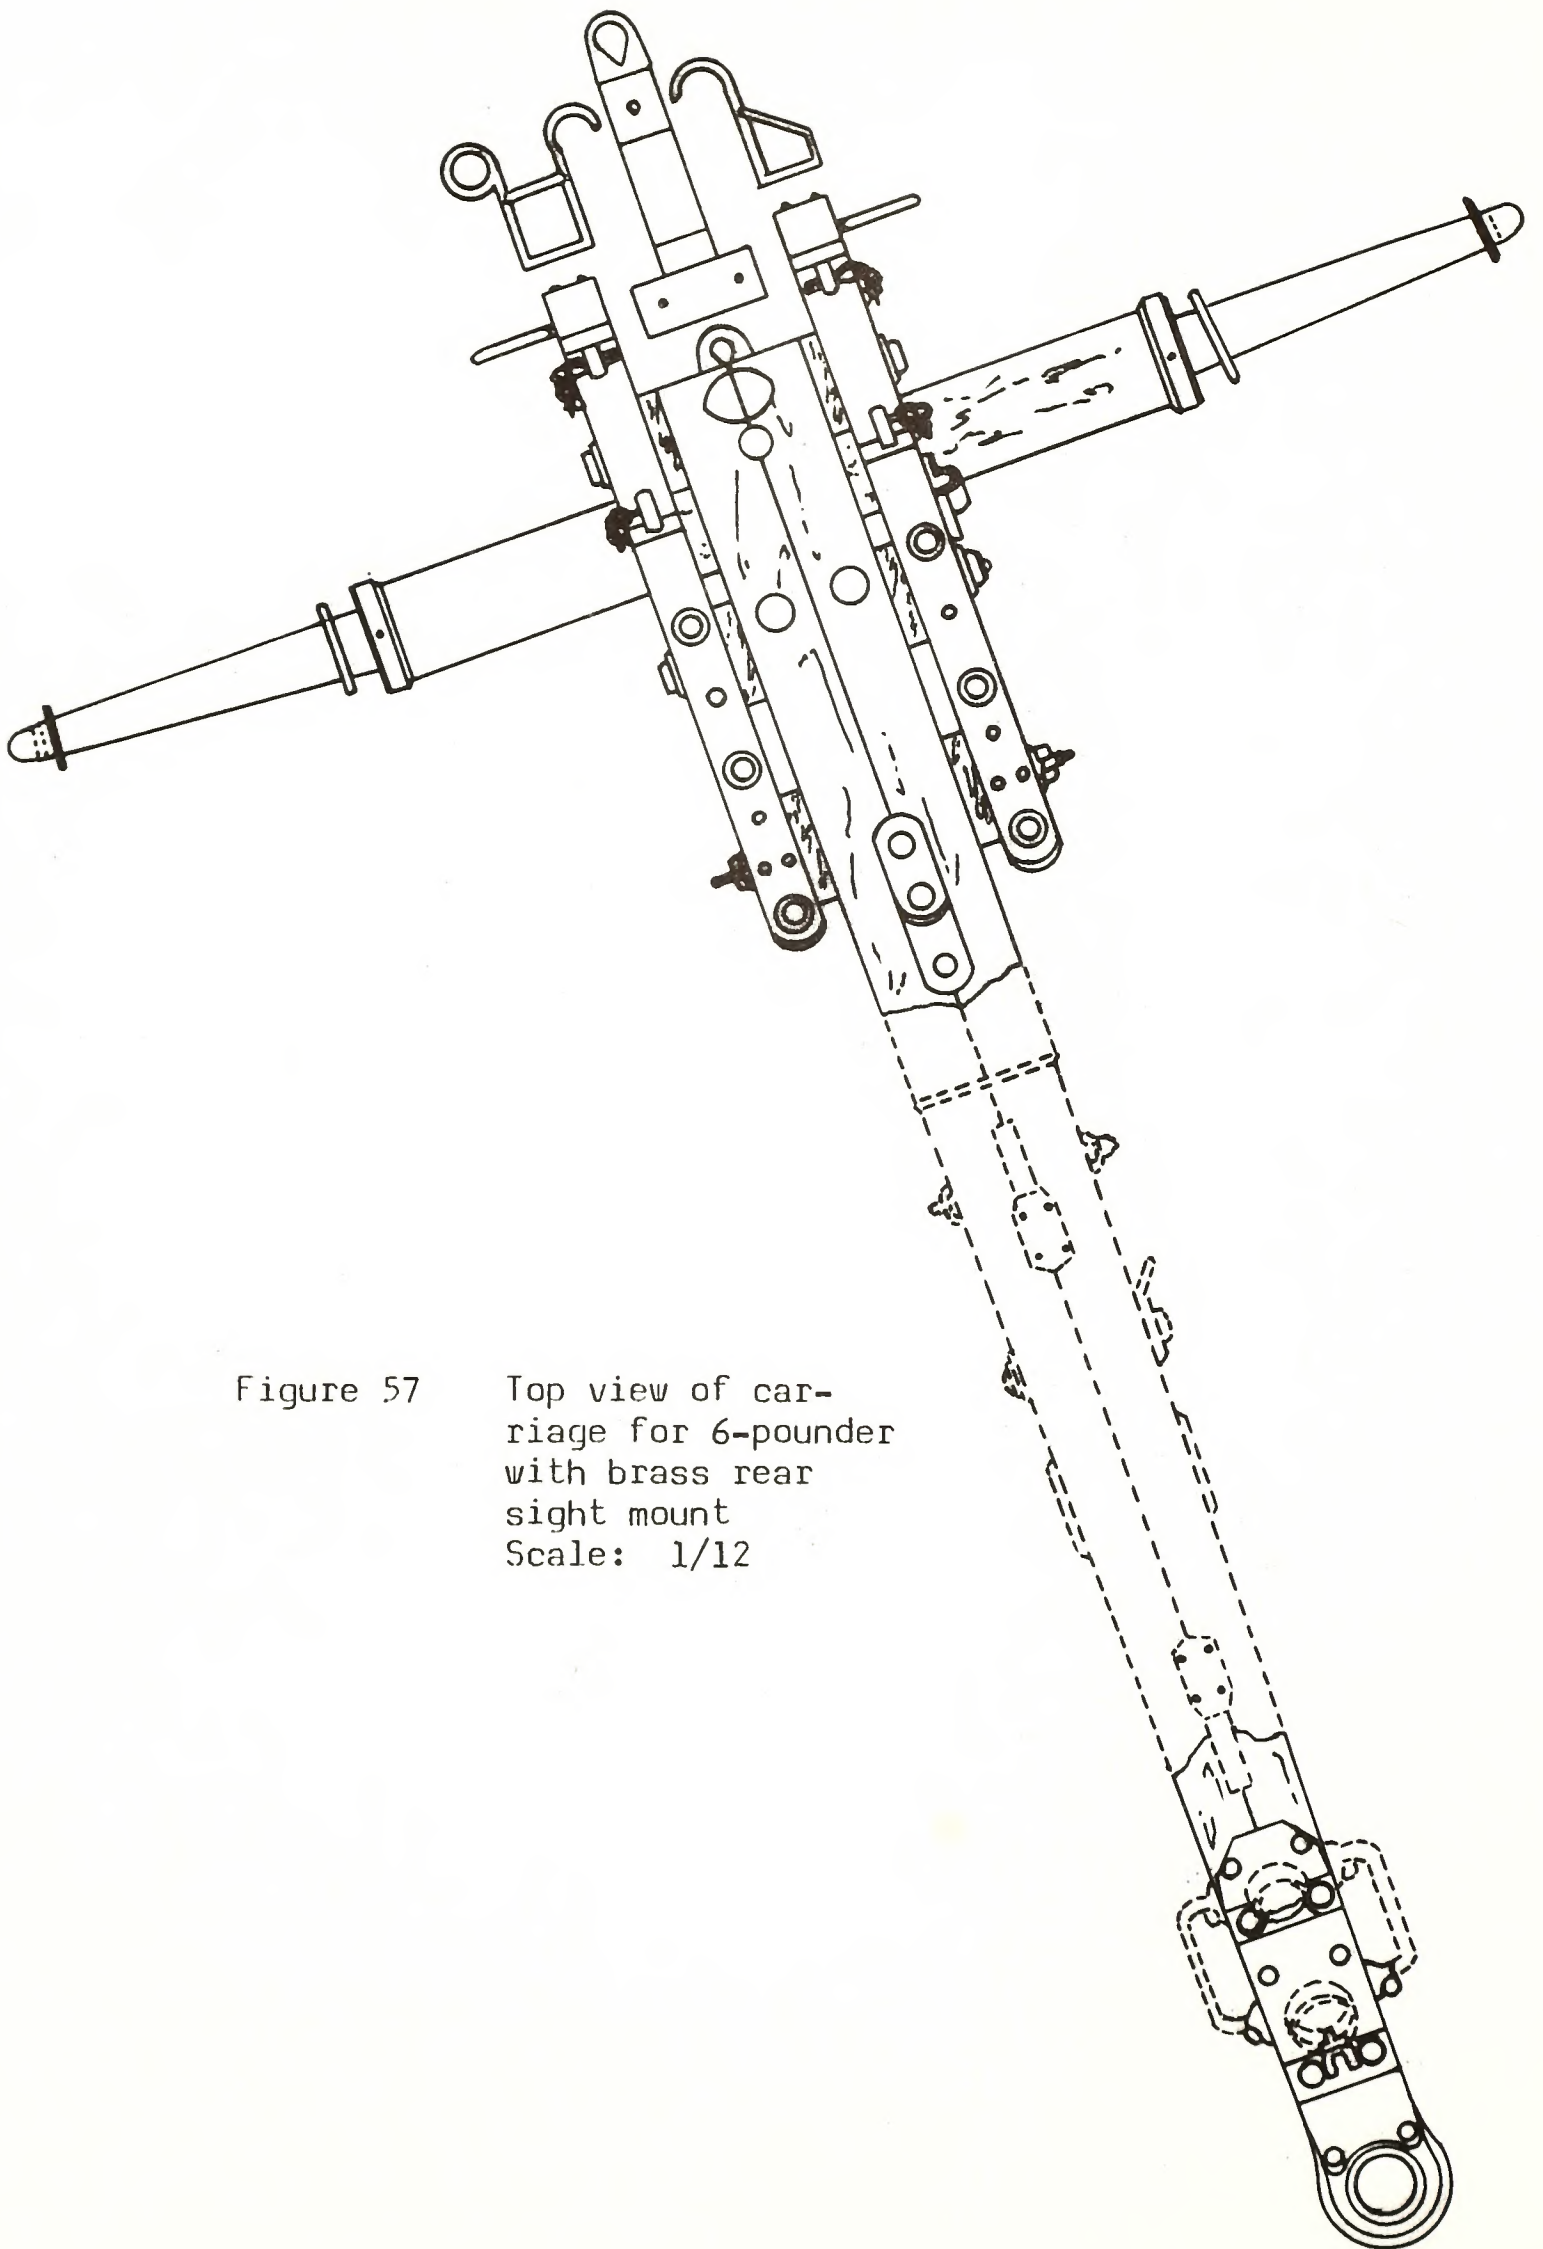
Top view of carriage for 6-pounder with brass rear sight mount
